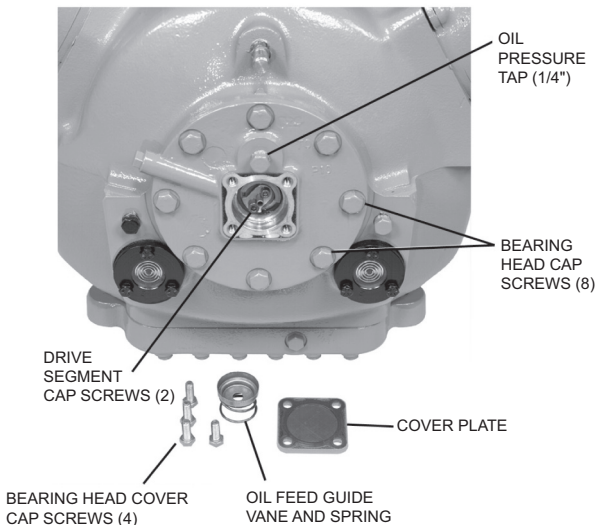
Removing Pump End Bearing Head (06E Compressor)
